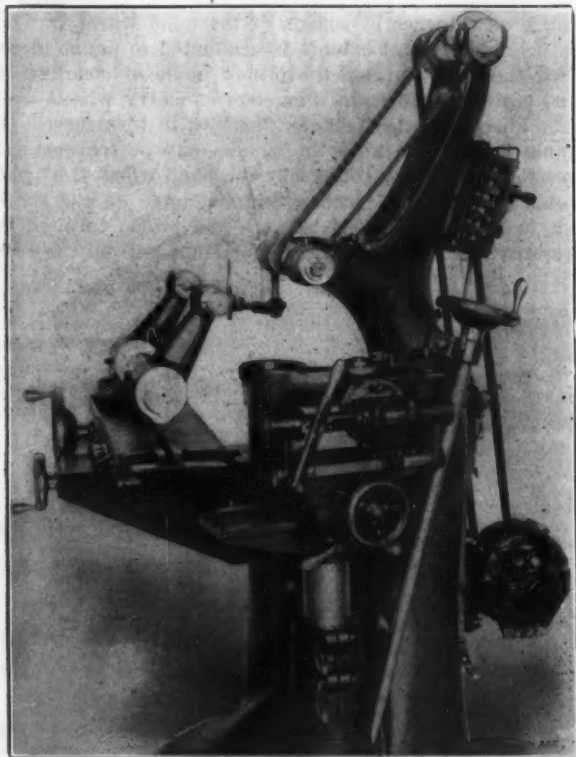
A Machine Equipped with Motor Drive Now Being Exhibited at the World's Fair.
